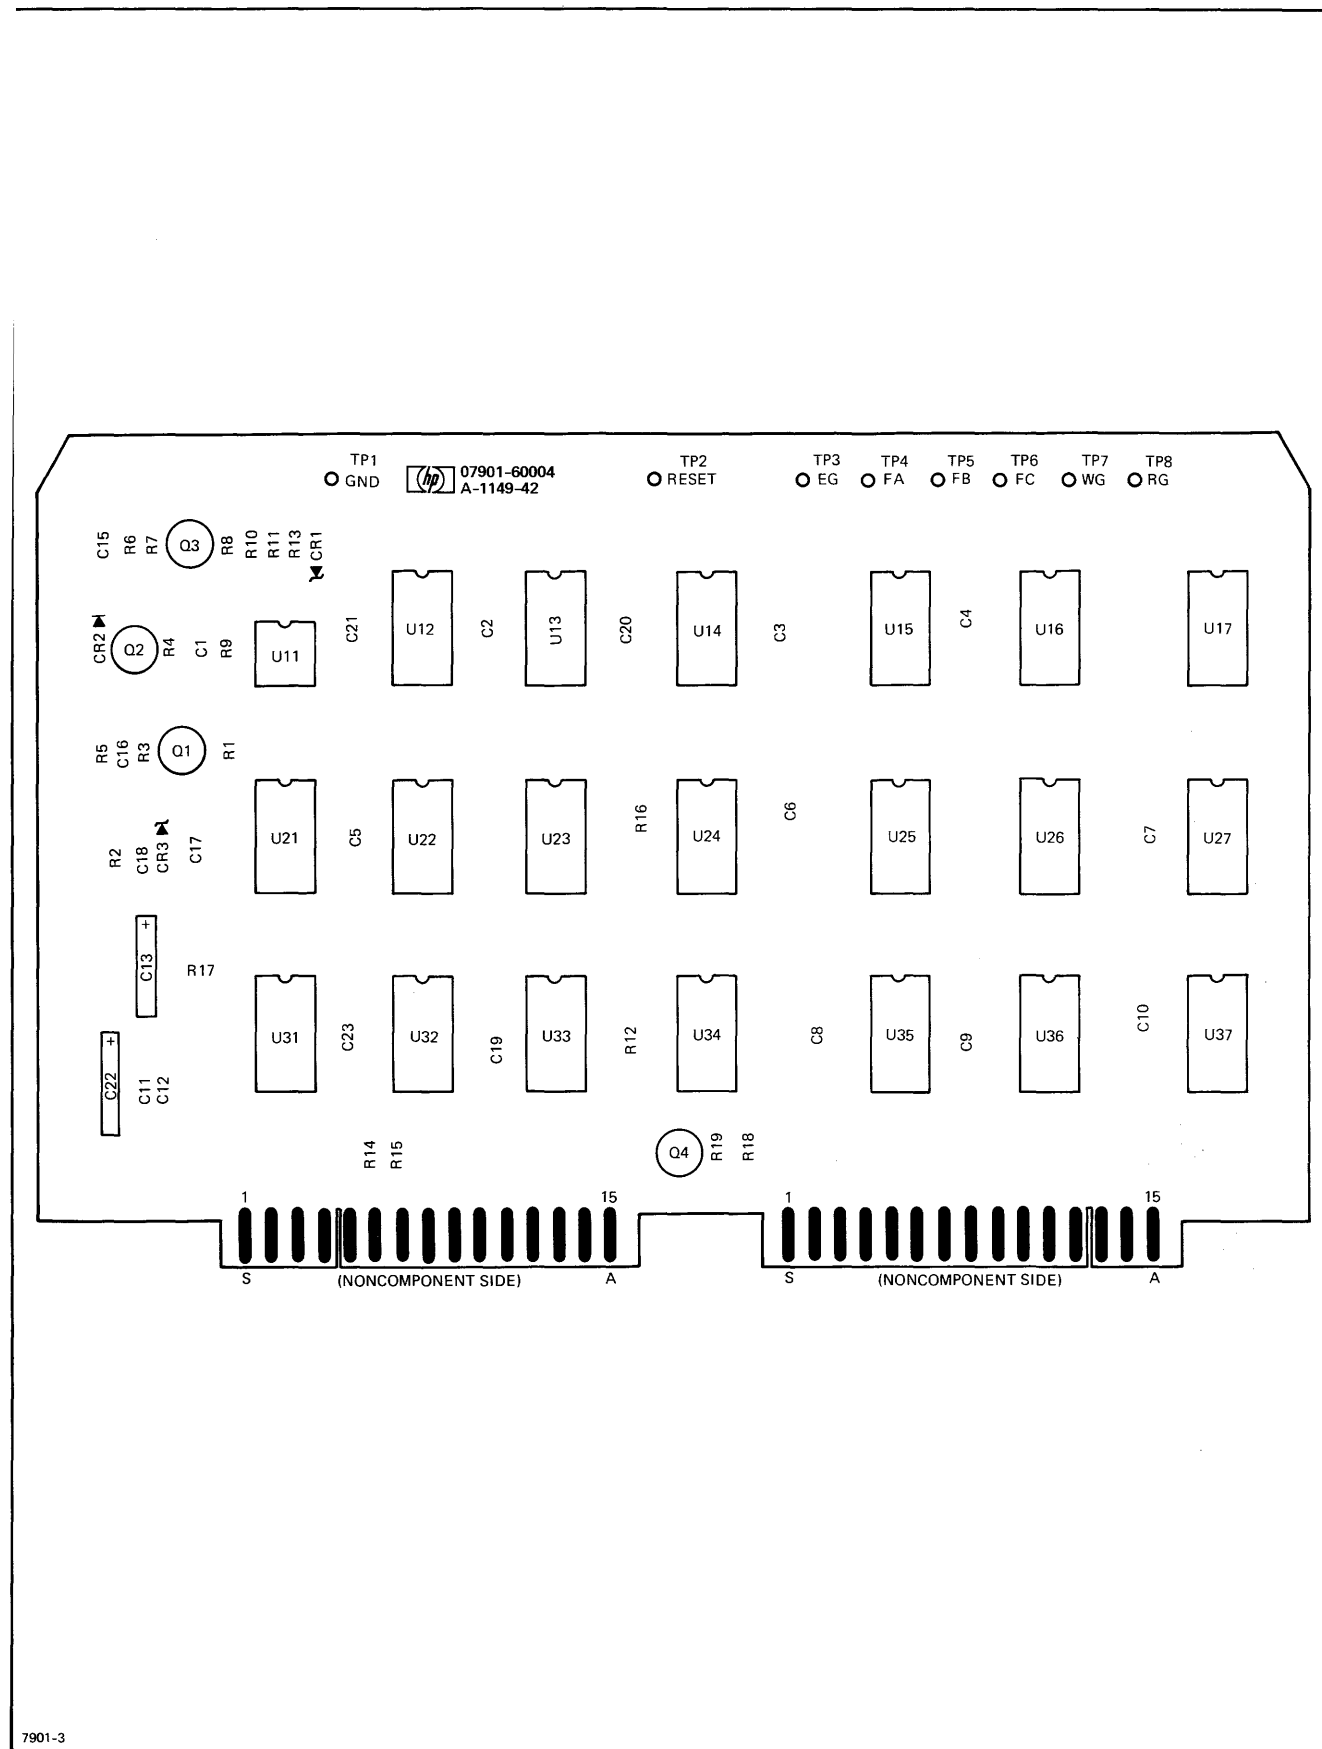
Read/Write Control PC Assembly A7, Parts Location Diagram
